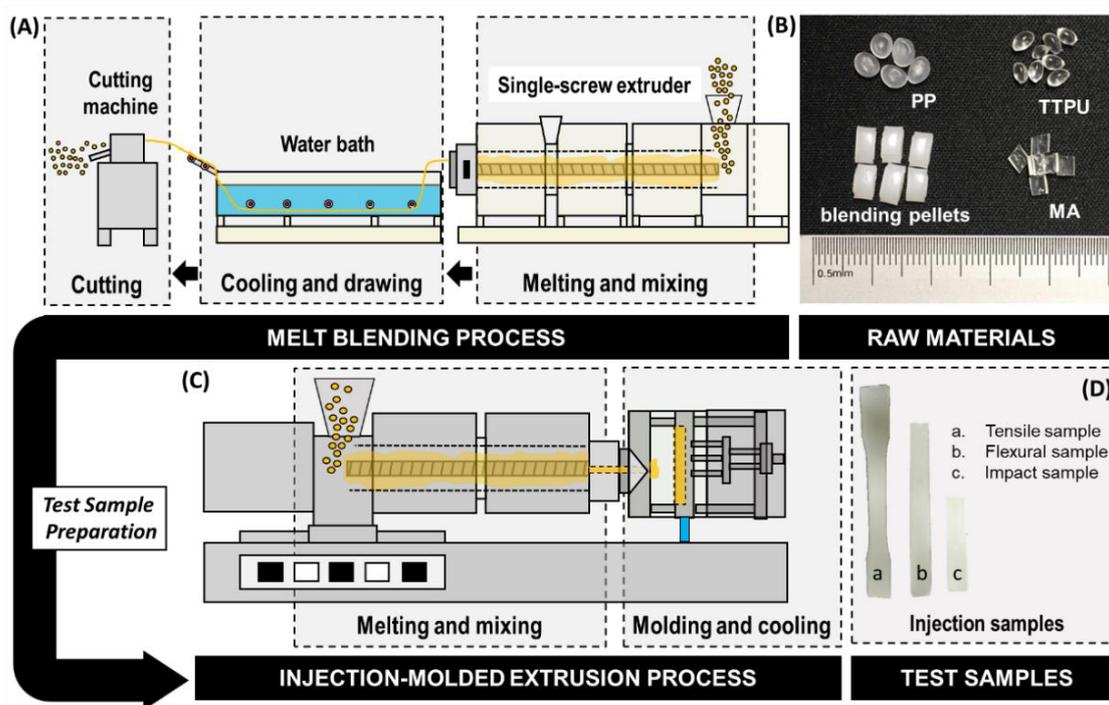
(A) Melt-blending process of PP/MA/TTPU blending pellets, (B) raw materials and resulting pellets, (C) injection-molded extrusion process, and (D) test samples of PP/MA/TTPU blends made by injection-molded extrusion process.
